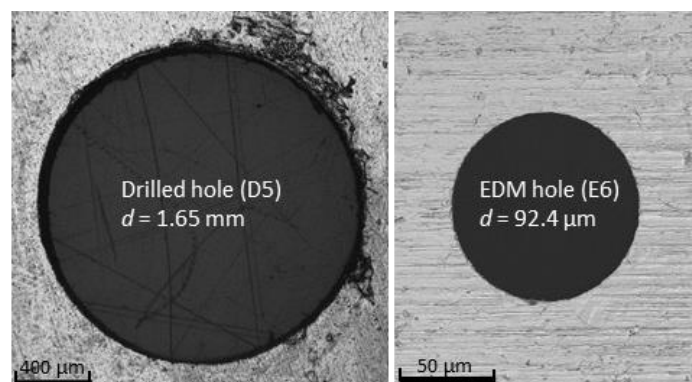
Test sample of drilled hole and electric discharge hole.
